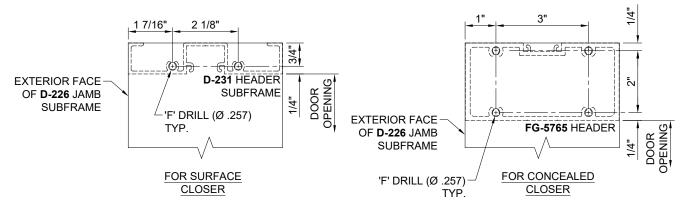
Fabrication for Curtain Wall Subframe at Headers
